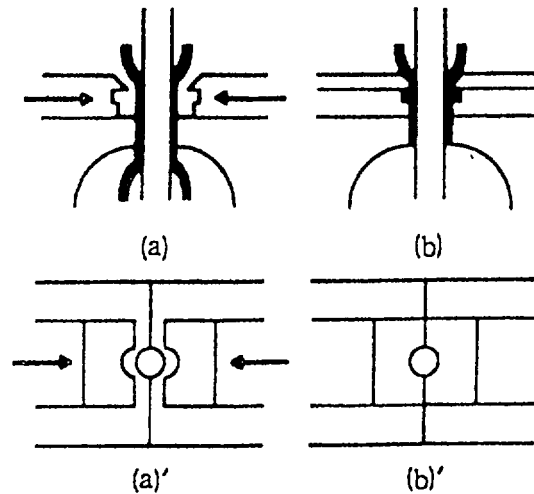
Conceptual drawing of automatic trimming of the mouth for cut-off Type bottles molding process
